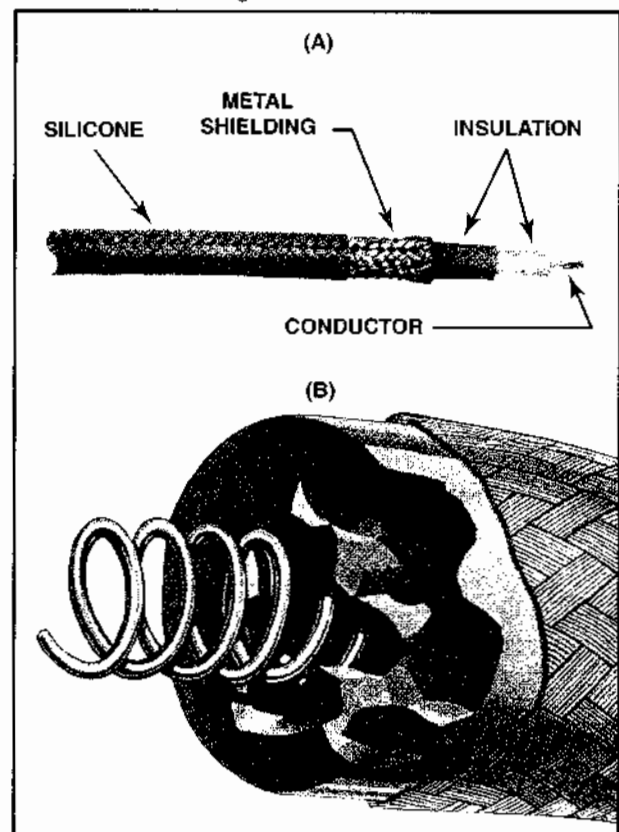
(A) A typical ignition lead consists of a center conductor, one or more layers of insulation, and a silicone-impregnated layer of metal shielding. (B) Instead of using stranded wire, some ignition leads use a single wire shaped in a continuous spiral.
